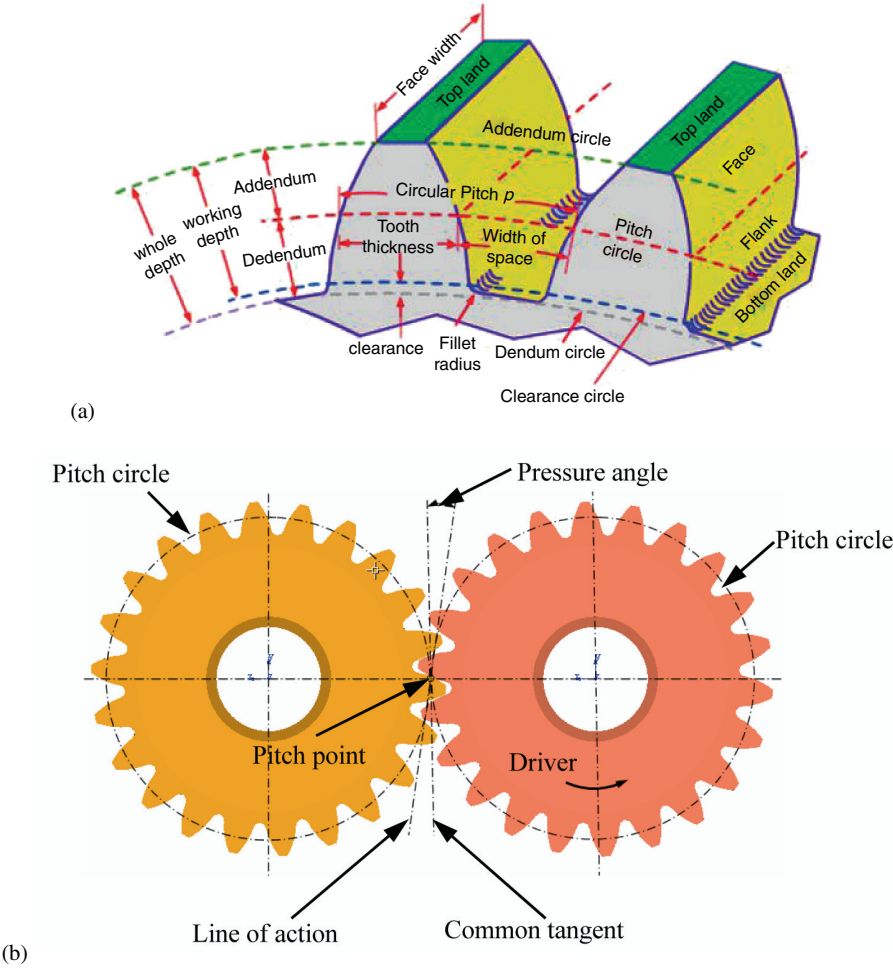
(a) Gear geeth representation. (b) Pair of mating gears
